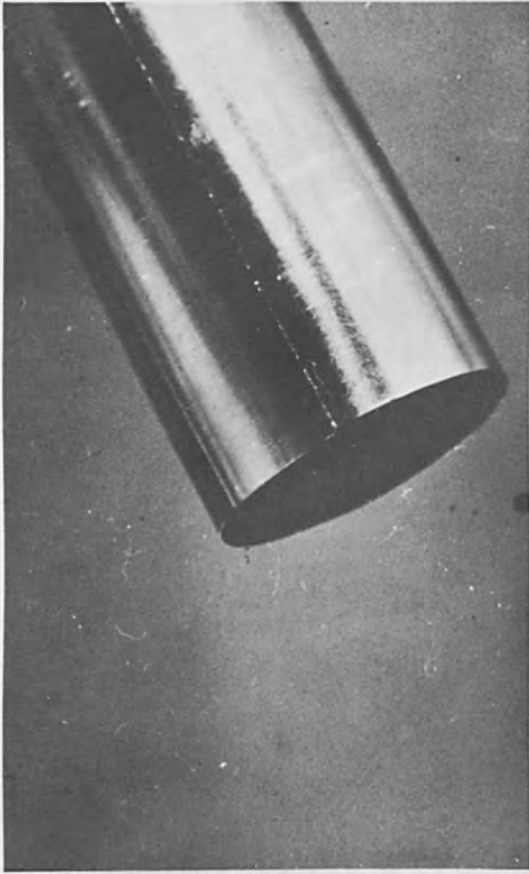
Stainless-steel sleeve of 0.008-in. wall thickness EB-welded with 0.004-in. weld penetration.
